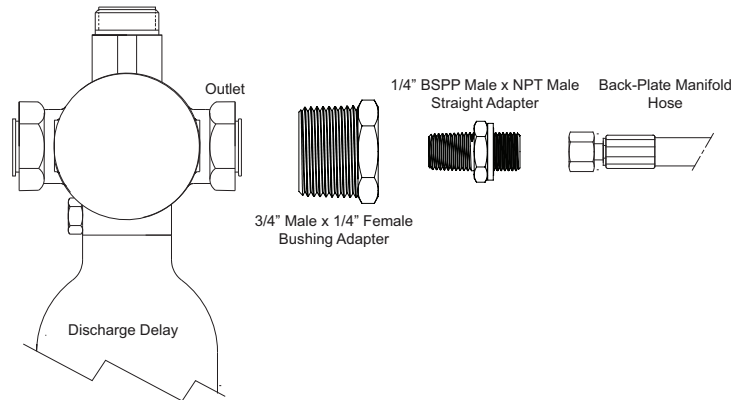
Discharge Delay Outlet Adapters and Hose
